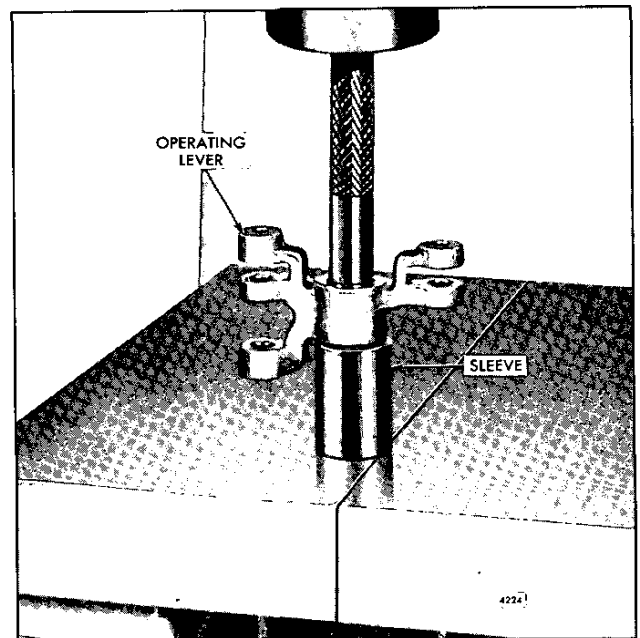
Removing Control Link Operating Lever Bearings Using Tool J 8985
